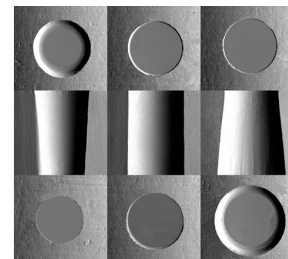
Stainless steel, t=0,25mm, drilling diameter = 150µm (cylindrical hole)
